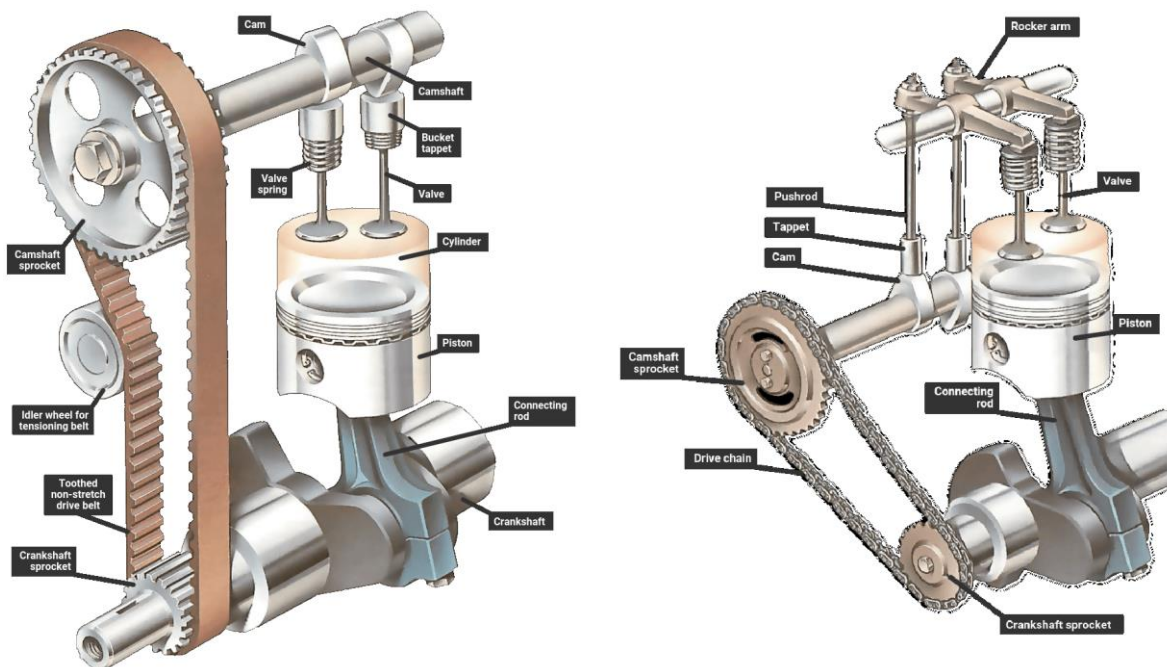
Two different arrange of engine valvetrain. Single over head camshaft (left) & Over head valve or pushrod engine (right) from pngegg.com
